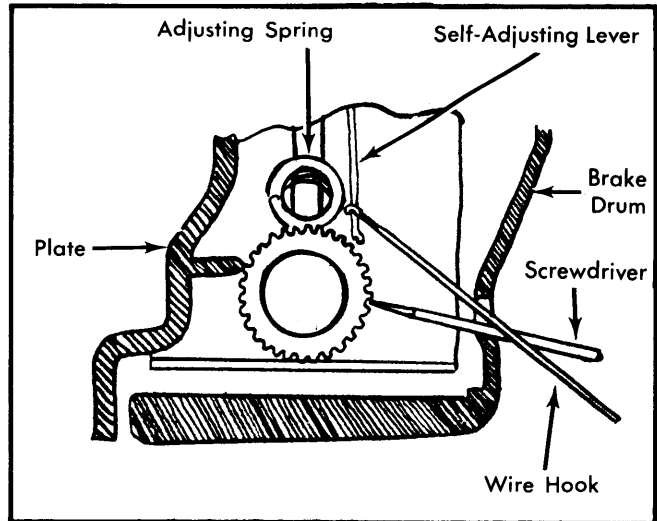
Adjusting Brake Shoe Clearance (Through Drum)
